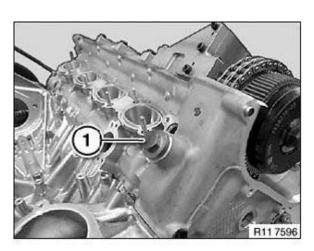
Identifying Left Hydraulic Chain Tensioner Bolt Courtesy of BMW OF NORTH AMERICA, INC.
